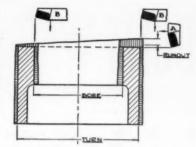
Tool "A" takes facing cut removing scale and runout on back of casting. Tools "B" then take turning and boring cuts. This practice enables tools "B" to hold size better thruout entire length of cut since they start in cleam metal.
